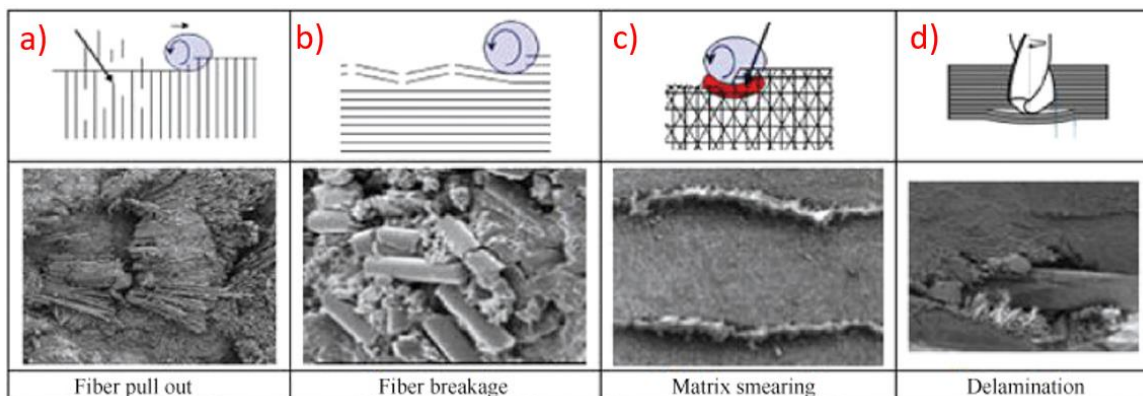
Representation of machining induced damage in composite materials [32]
